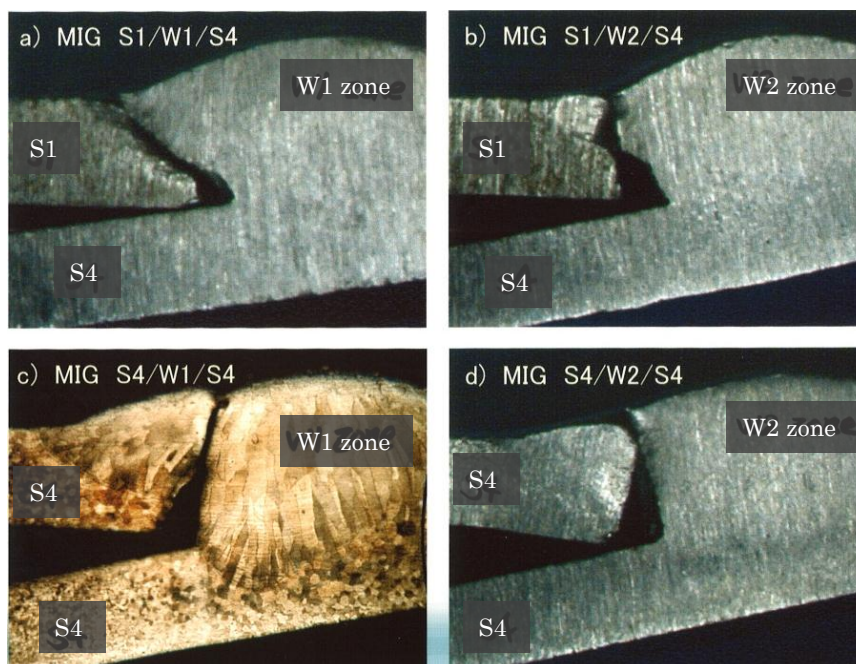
Sectional views of fatigue fracture of joints. Sample was polished and etched only for (c)
